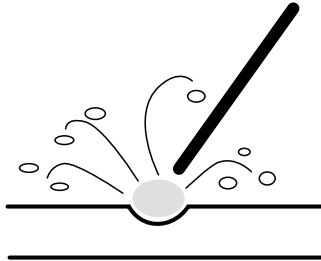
Spatter. Small droplets of molten metal ejected from the weld zone.
